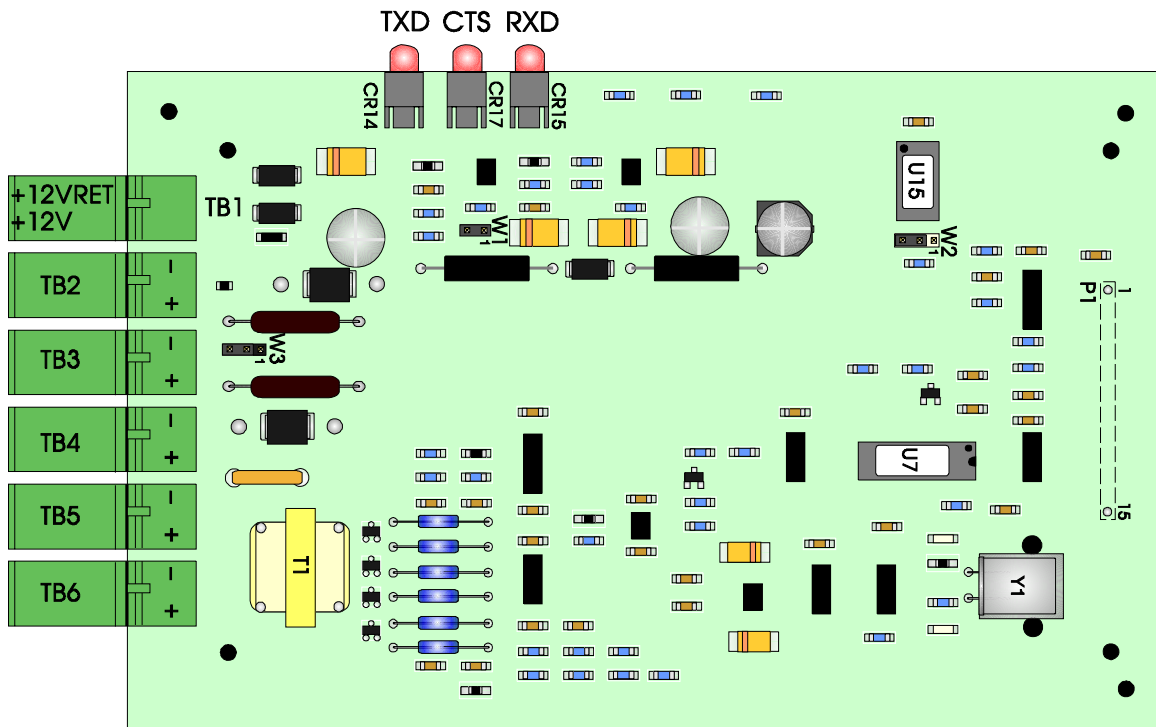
12V Transmitter Intf. Board P/N 392912-01-5 (RTU 3310 or DPC 3330)
